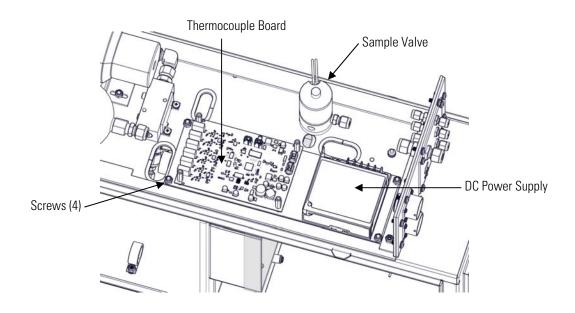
Thermocouple/Power Supply Assembly Top View
